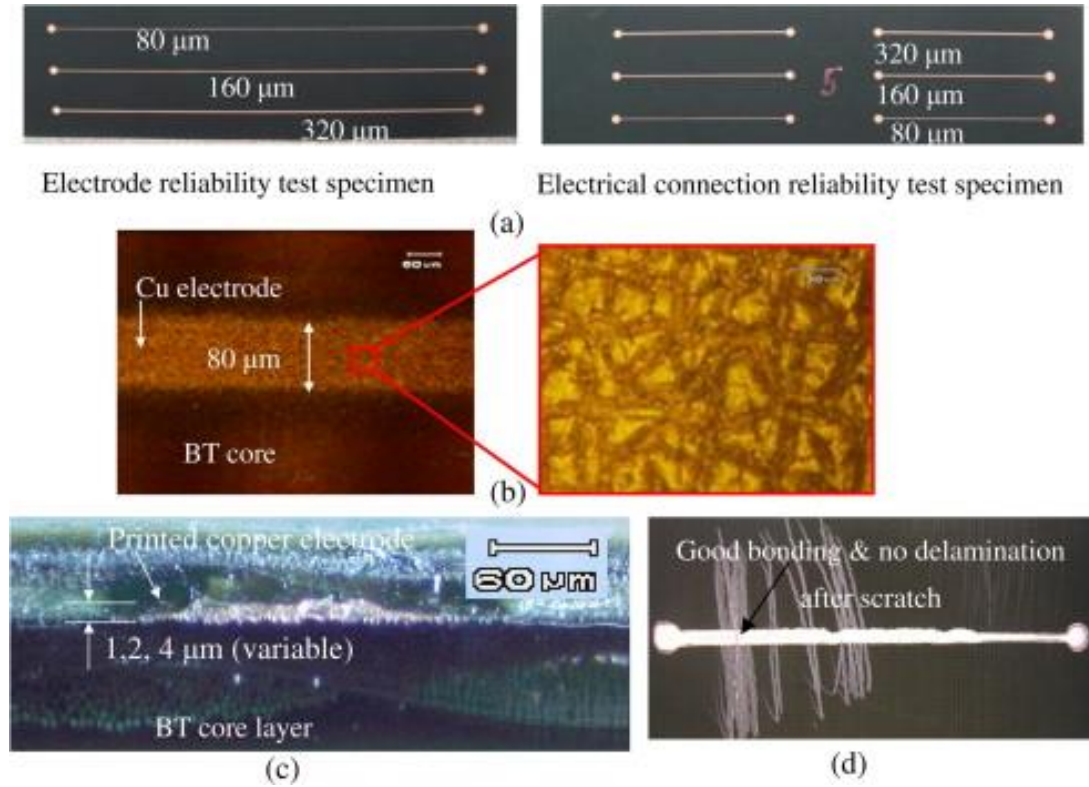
Printed copper electrode: (a) photograph; (b) optical microscope top view; (c) cross-section view of the printed electrode; (d) experiment results of a scratch test using a diamond-tip pen. Reproduced with permission from²².
